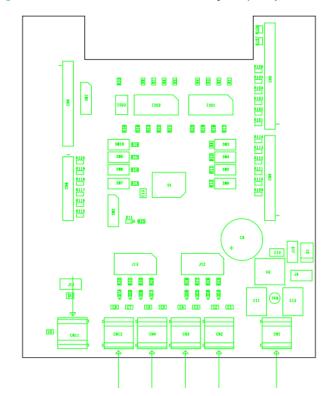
X-NUCLEO-OUT09A1 PCB layout (component side)
